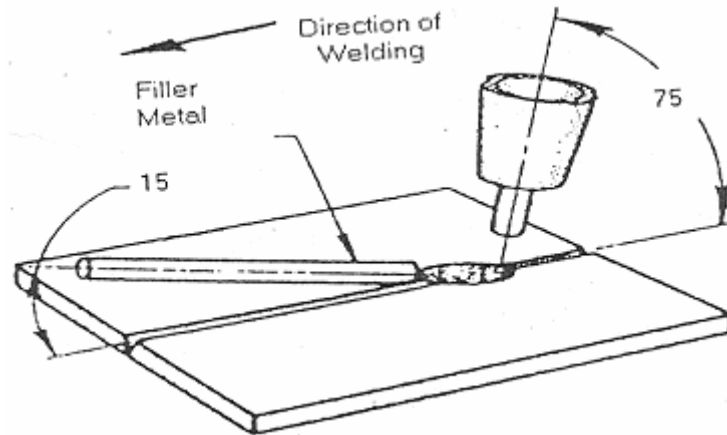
Motion of filler metal and nozzle condition for a manual TIG welding
